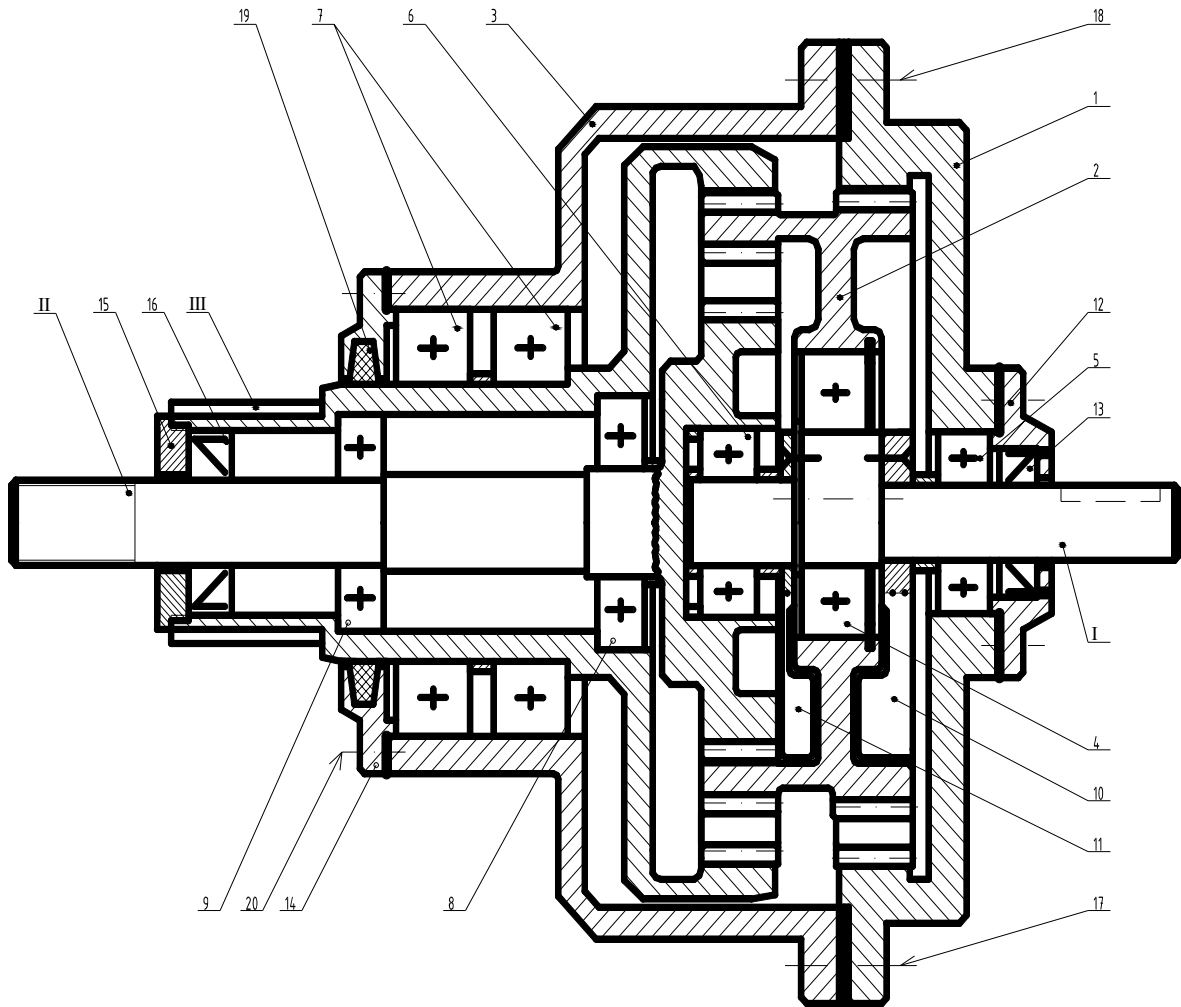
Basic construction of the two-stage transmission with one internal impeller toothed wheel with the fixed balancing on input shaft
